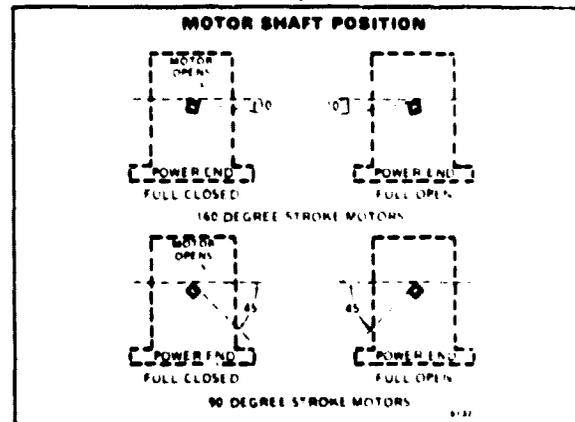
MOTOR SHAFT POSITION AT ROTATIONAL LIMITS (AS VIEWED FROM THE POWER END OF THE MOTOR).
